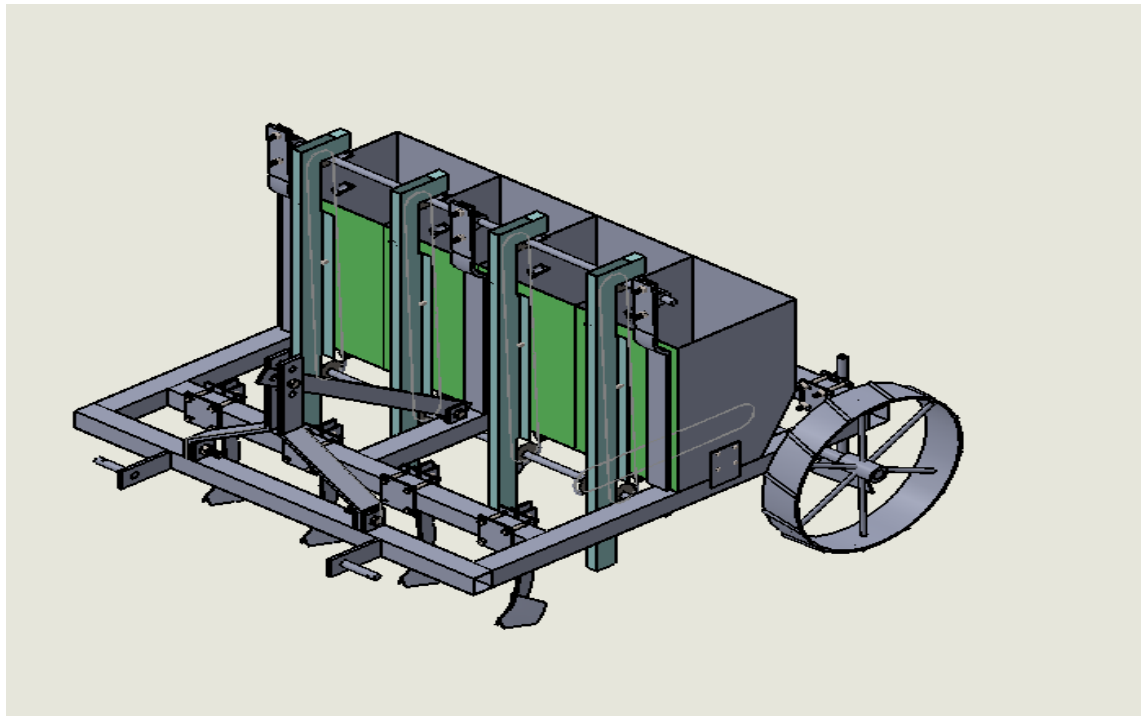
Isometric drawing of tractor drawn garlic planter
